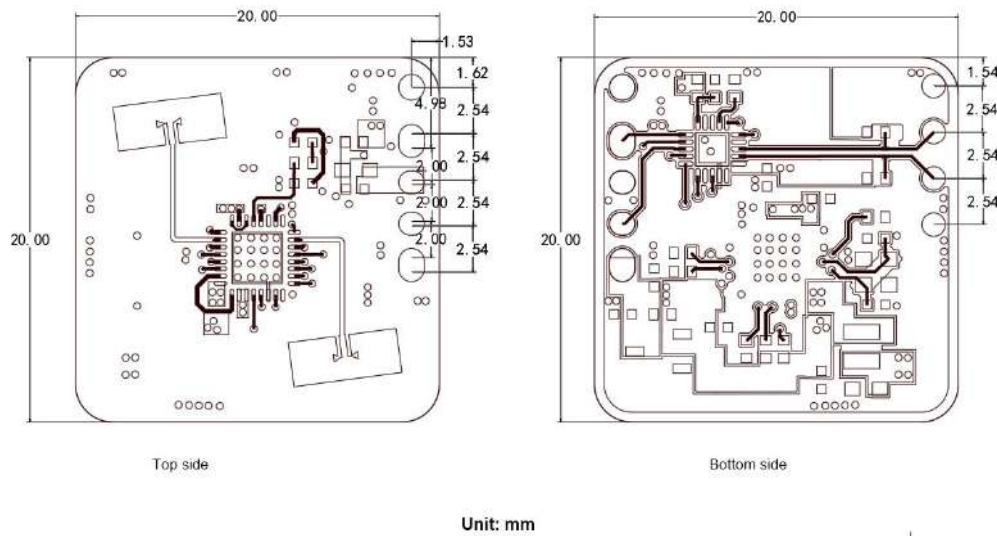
Hardware HLK-LD2402 Mechanical Dimensions
